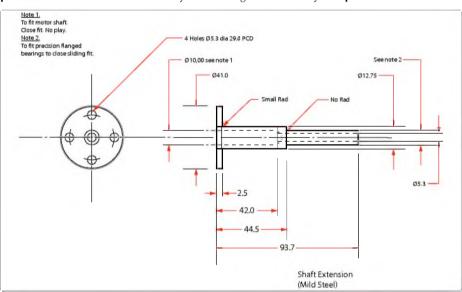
The flanged shaft extension is the most critical component in the assembly. Get this right and you are in with a chance!
